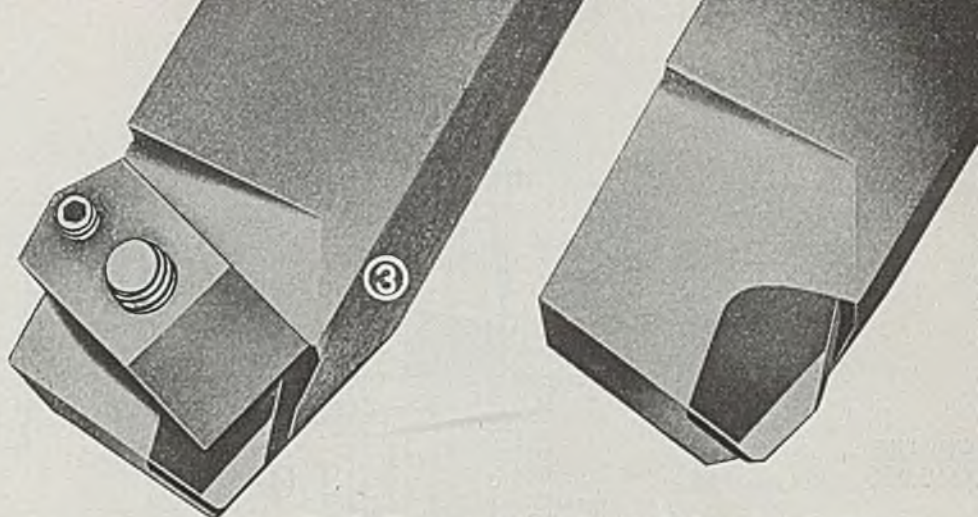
Two types of tool bits used—brazed tip (right), and mechanically-held tip (left)
